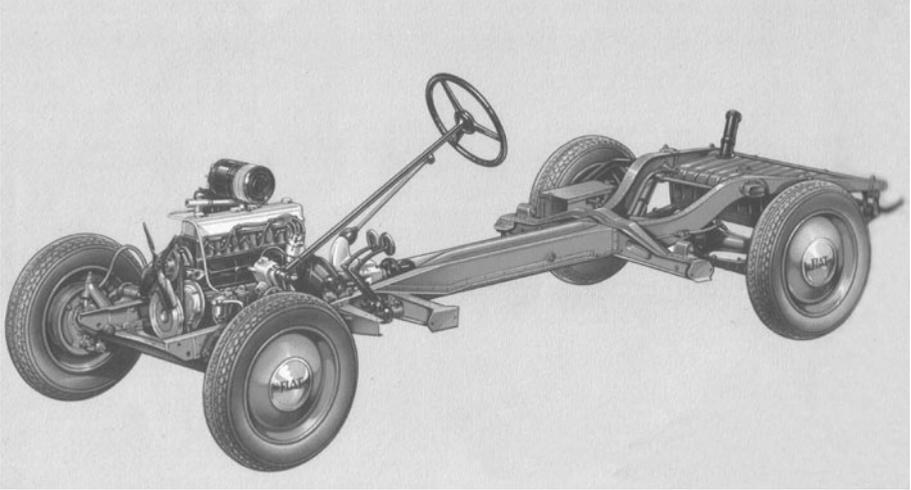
Chassis frame of the FIAT 1500 of 1935; the different parts are made by steel sheets formed in closed stamps and they are welded. The shapes that can be obtained have closed section and allow weight reduction at an increased stiffness; it is possible now to design different sections for their local stress. The two side beams are joined together to obtain a stiff tubular structure. Crossbeams are changed to cantilevers.
